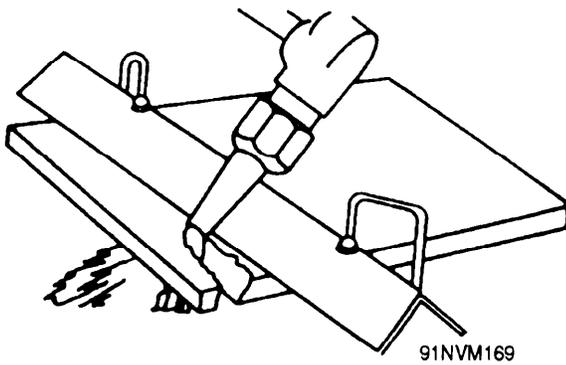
Bevel cutting with an oxyacetylene torch.
